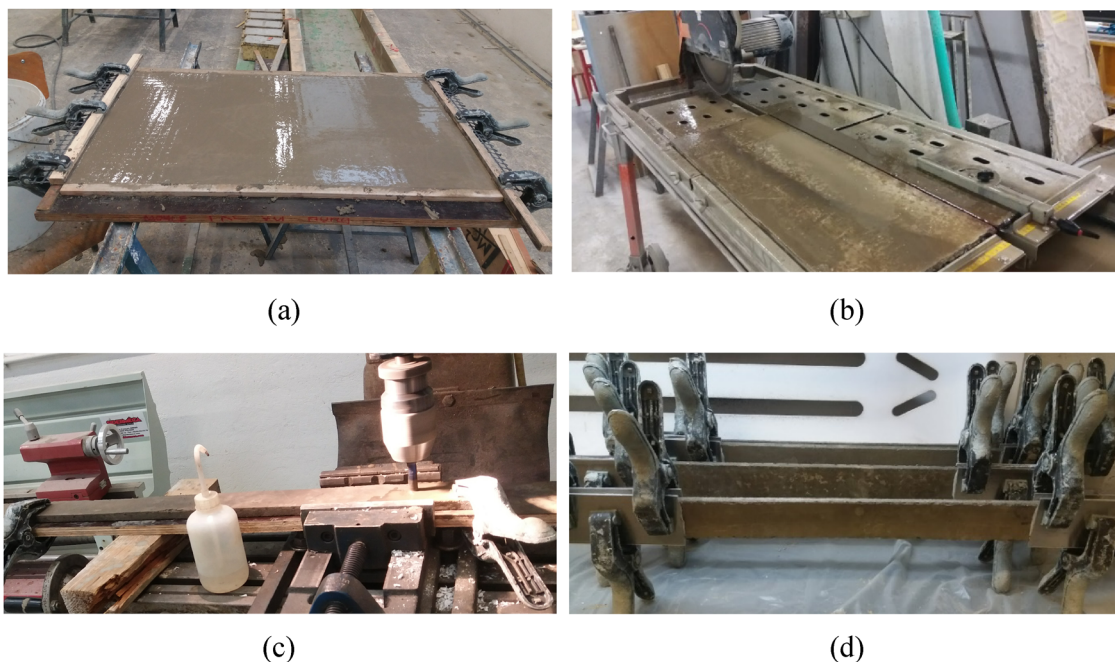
Procedure for preparing the C-TRC composite specimens. (a) Hand lay-up moulding technique. (b) Cutting to C-TRC specimens. (c) Making hole in the C-TRC specimens. (d) Bonding two ends with aluminum plates.
